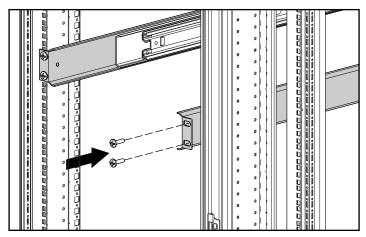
Attaching the back of the rack mounting bracket assembly
